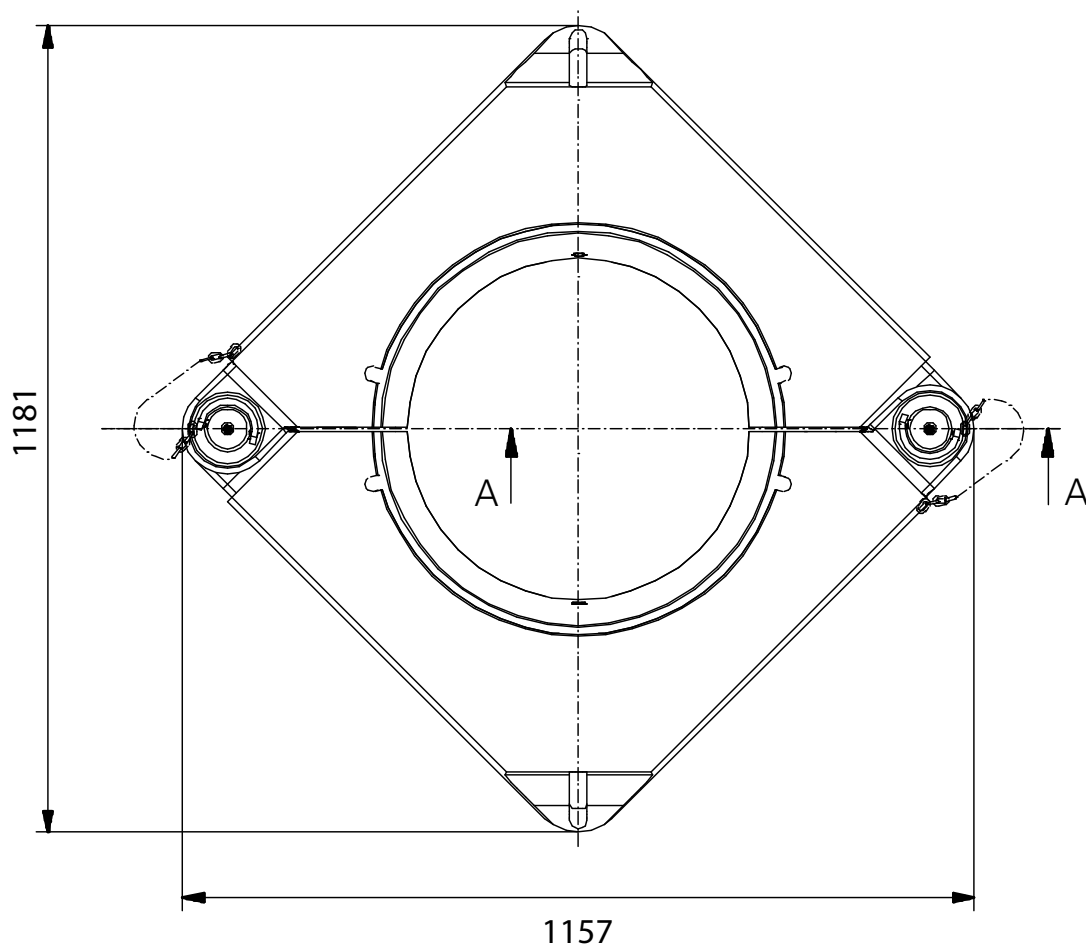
Principle drawing of a HCS 200-20"-18.5/8" main dimensions
